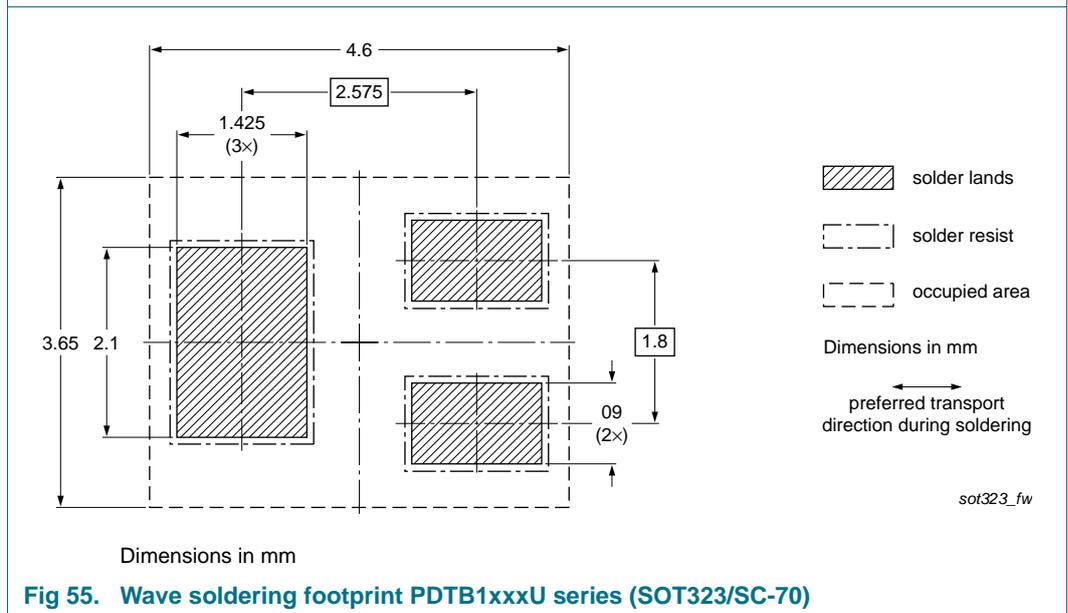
Wave soldering footprint PDTB1xxxU series (SOT323/SC-70)
